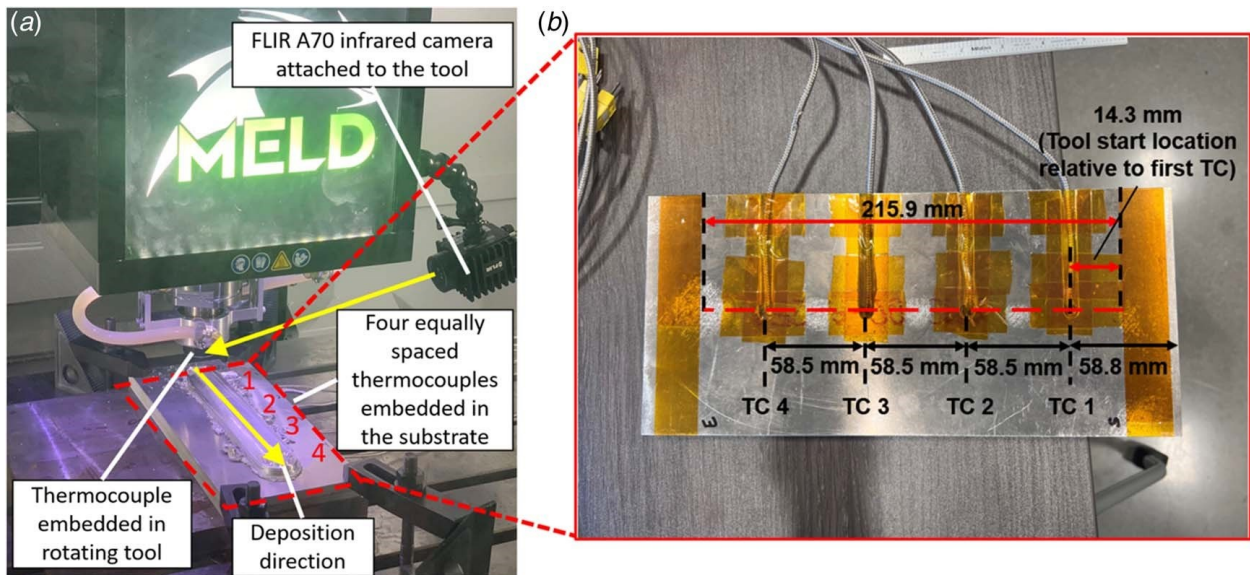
Experimental setup for depositing 7075 aluminum feed rod on a 7075 aluminum substrate for 30 layers using the MELD Manufacturing L3 machine. (a) A thermocouple embedded in the tool was used to measure the tool temperature near the deposition interface. A FLIR A70 infrared camera was attached to the spindle carriage to measure the external temperature at the tooltip. Four equally spaced thermocouples were embedded in the substrate for measuring temperature evolution beneath the deposition track. (b) Substrate with locations of the four thermocouples. The location nearest the deposit start is marked with an “S,” and the location nearest the deposit end is marked with an “E.”
